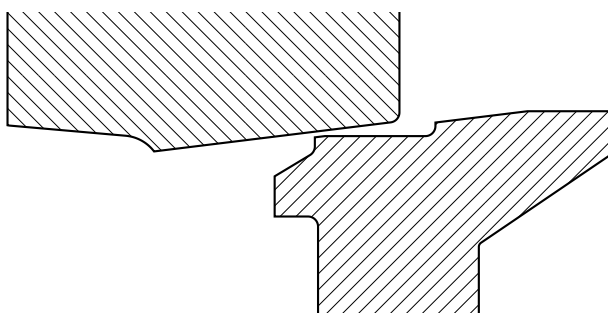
Conical RFW design concept for the lightweight gear wheel, in which the aluminum alloy core is allowed to deform to adapt the conical shape of the steel ring
